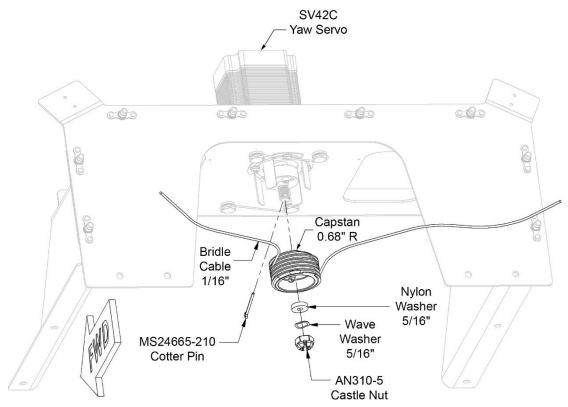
Removing Bridle Cable and Capstan from Yaw Servo
